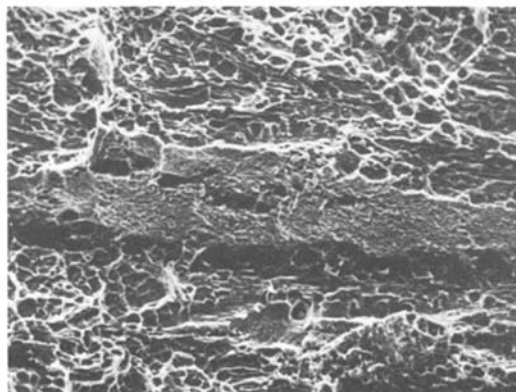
Fracture surface of a bend specimen. Scanning electromicrograph. (X340).
